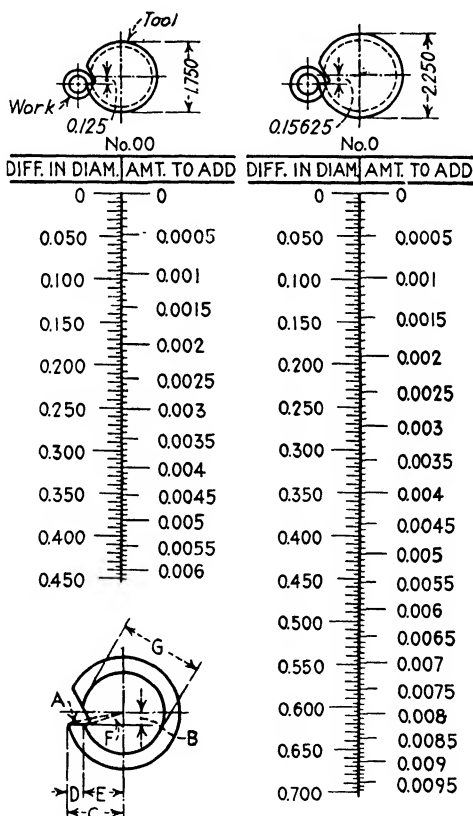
Tools for No. 00 and No. 0 B. & S. machine.
